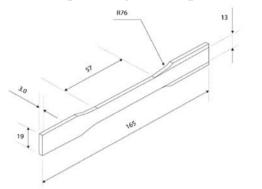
Standard dimensions of test specimen ASTM D638 type
